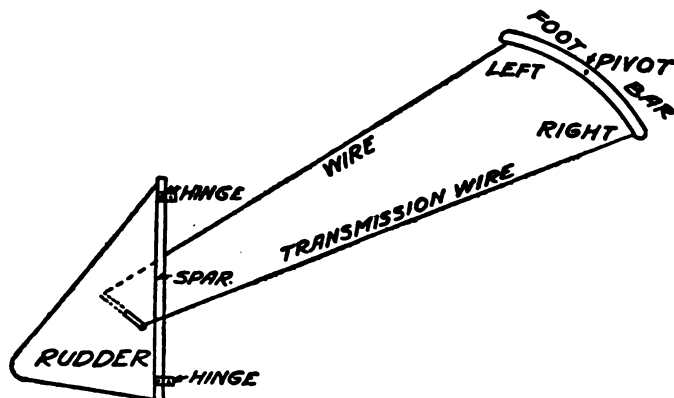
FOOT BAR CONTROL OF AN ELEVATION PLANE
